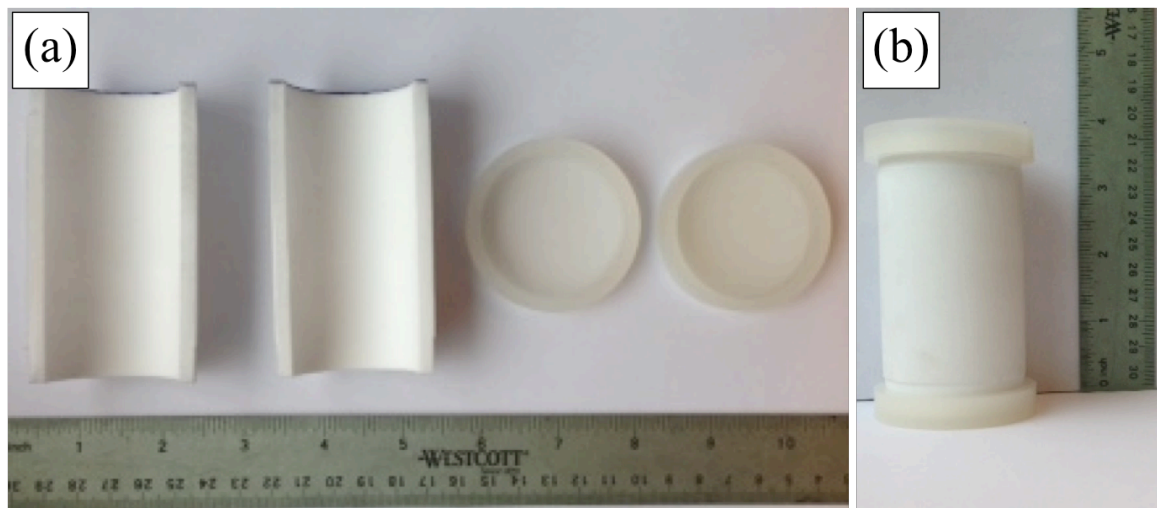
Fabricated split mold, (a) machined split mold and end caps, (b) front view of assembled split mold.
